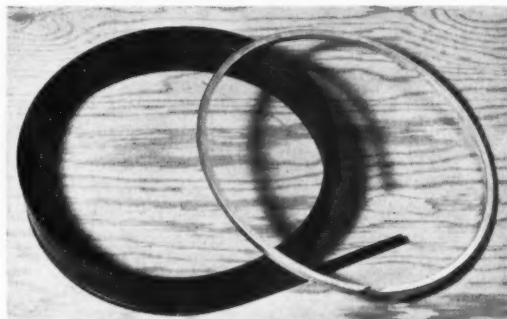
PHOTO SHOWS coiled bar prior to milling on fixture and finished rings. Rings after milling are plated.
